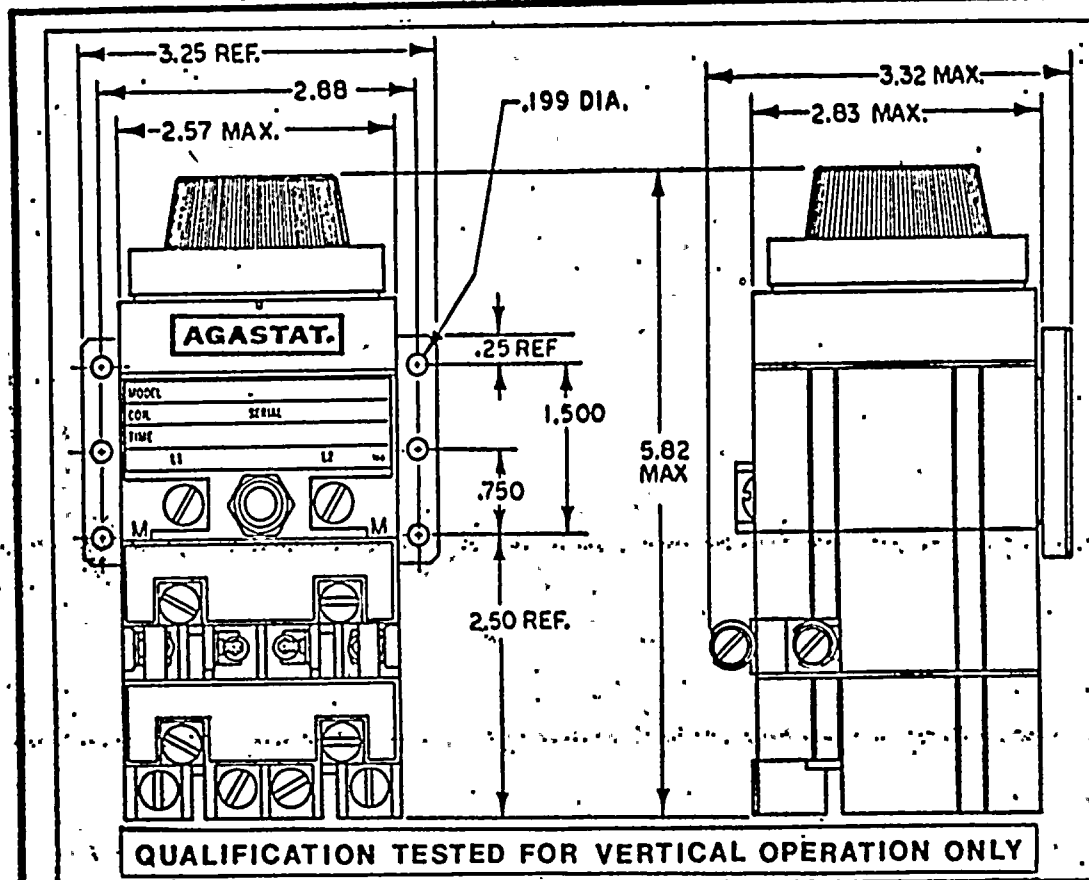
Model E7014 and E7024 Outline and Dimension Drawing
